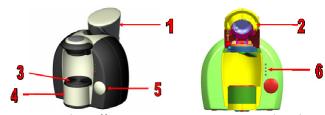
The coffee espresso type. 1 - water tank 1,7 l; 2 - brew mechanism; 3 - adjustable cup holder; 4 - removable drip-tray; 5 - start-stop button; 6 - led indicator removable drip-tray; 5 - start-stop button; 6 - led indicator
